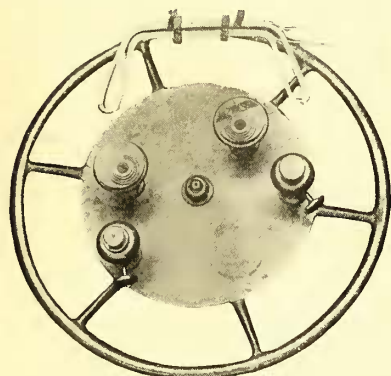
FORM FOR WINDING G. E.-800 ARMATURE COILS
